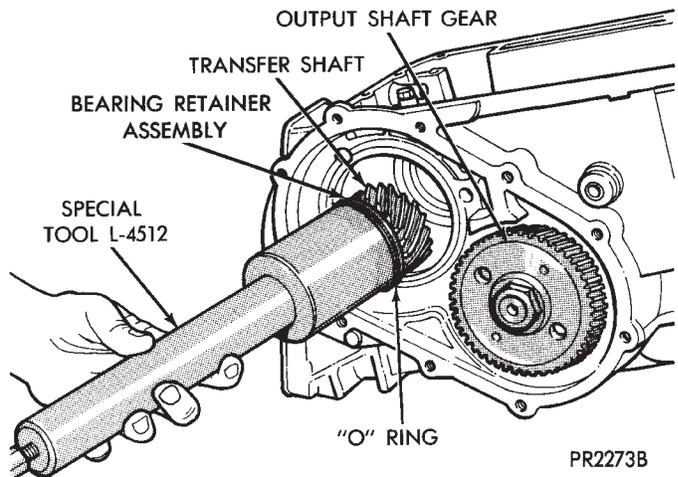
Remove Transfer Shaft and Bearing Retainer Assembly
